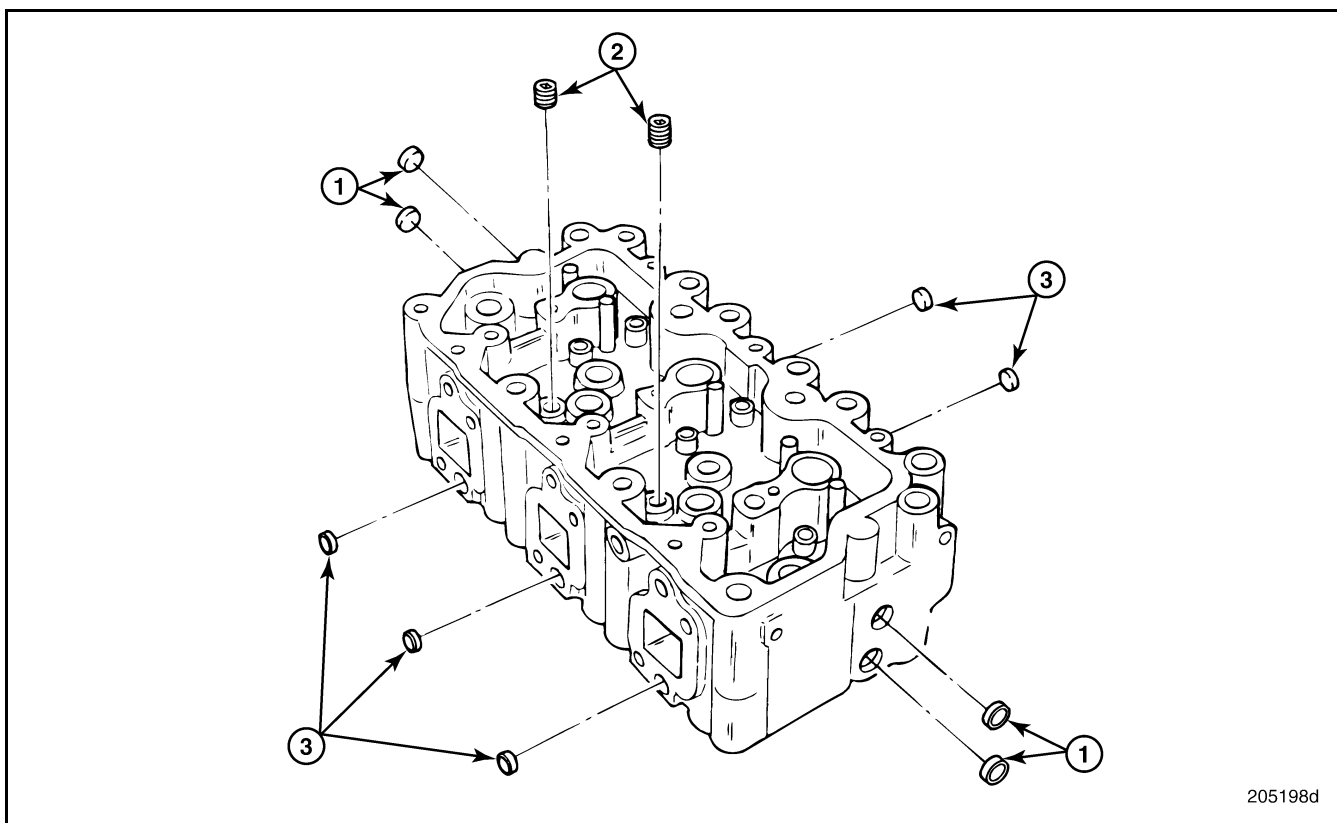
Cylinder Head Cup and Pipe Plug Locations
